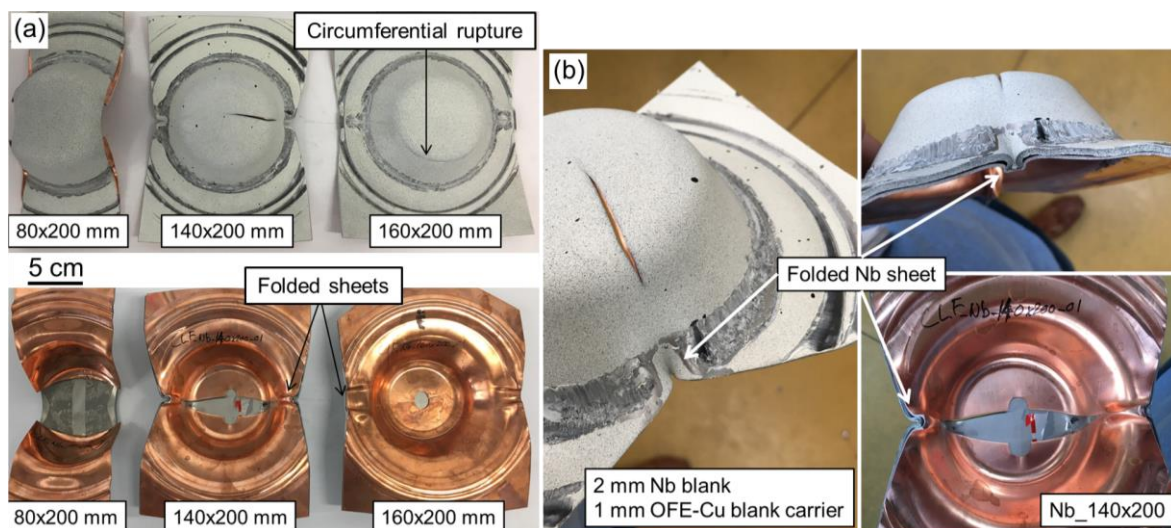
(a) Top and bottom views of deformed 80 mm x, 140 mm x, and 160 mm x 200 mm 2 mm thick niobium blanks and 1 mm thick annealed OFE copper blank carriers, and (b) additional views of the folded sheet for the 140 mm x 200 mm specimen.
